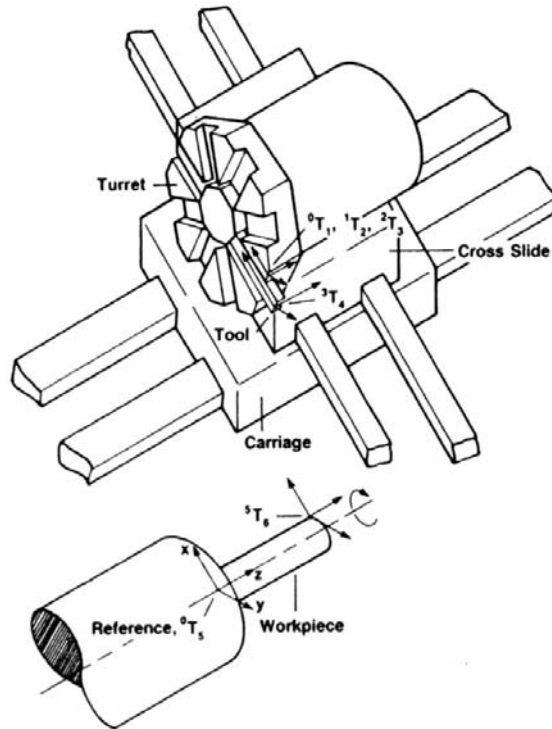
Coordinate frame nomenclature for machine tool (Courtesy of Donmez)
